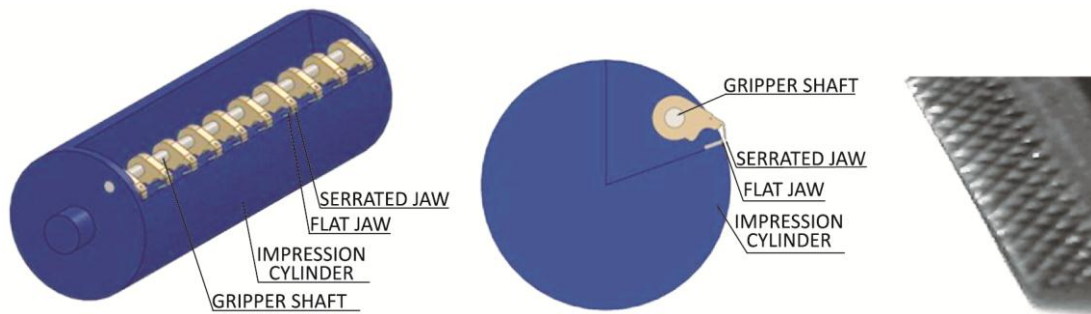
Gripper arrangement in a typical sheet fed offset printing machine and Serrations on a printing gripper
